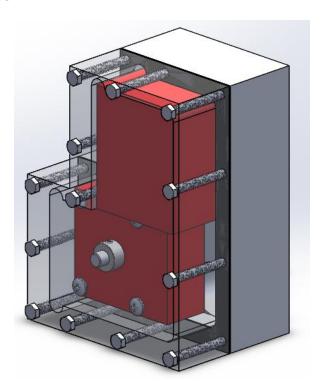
Elbow Gearbox and Case Assembly for Claw Movement
